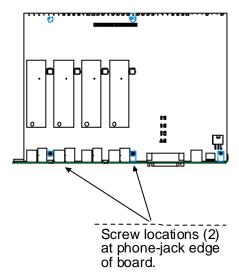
Screws to be removed and replaced with standoffs (phone-jack edge of board; top view)
